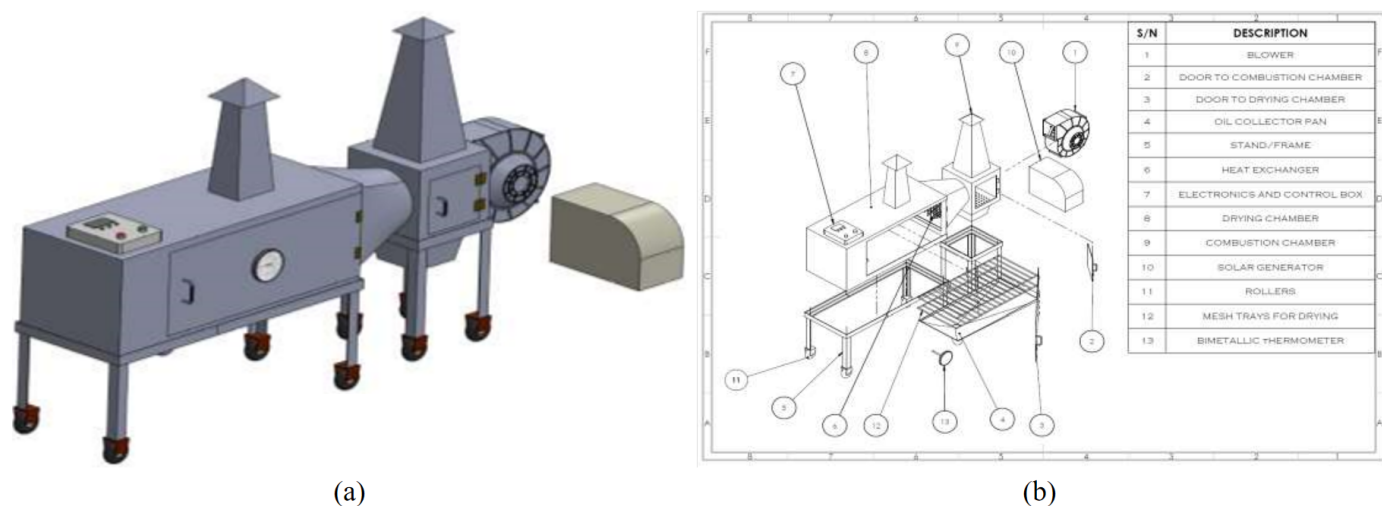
(a) Isometric view of the developed fish-drying kiln; (b) exploded view of the kiln.
